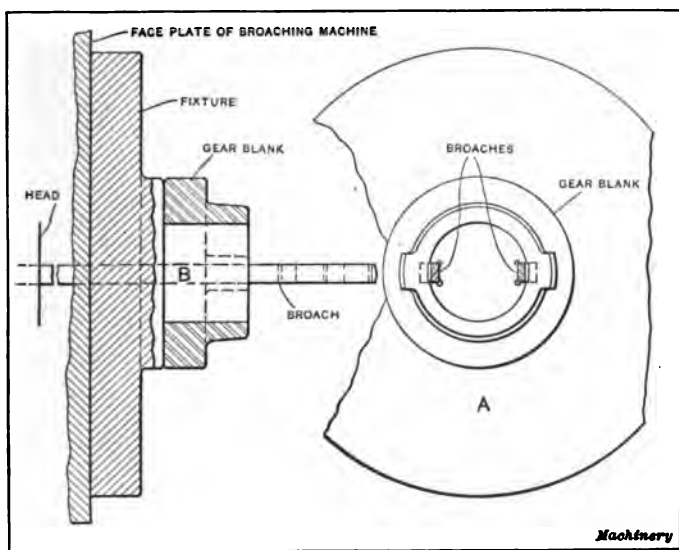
Fixture used for holding Gear Blanks while broaching Two Keyways in One Stroke of Machine
